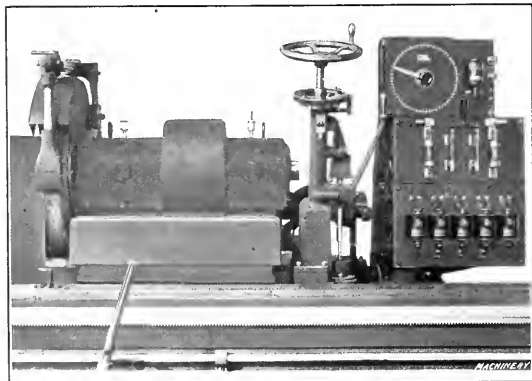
Electrical Apparatus for controlling Grinding Wheel Motor
